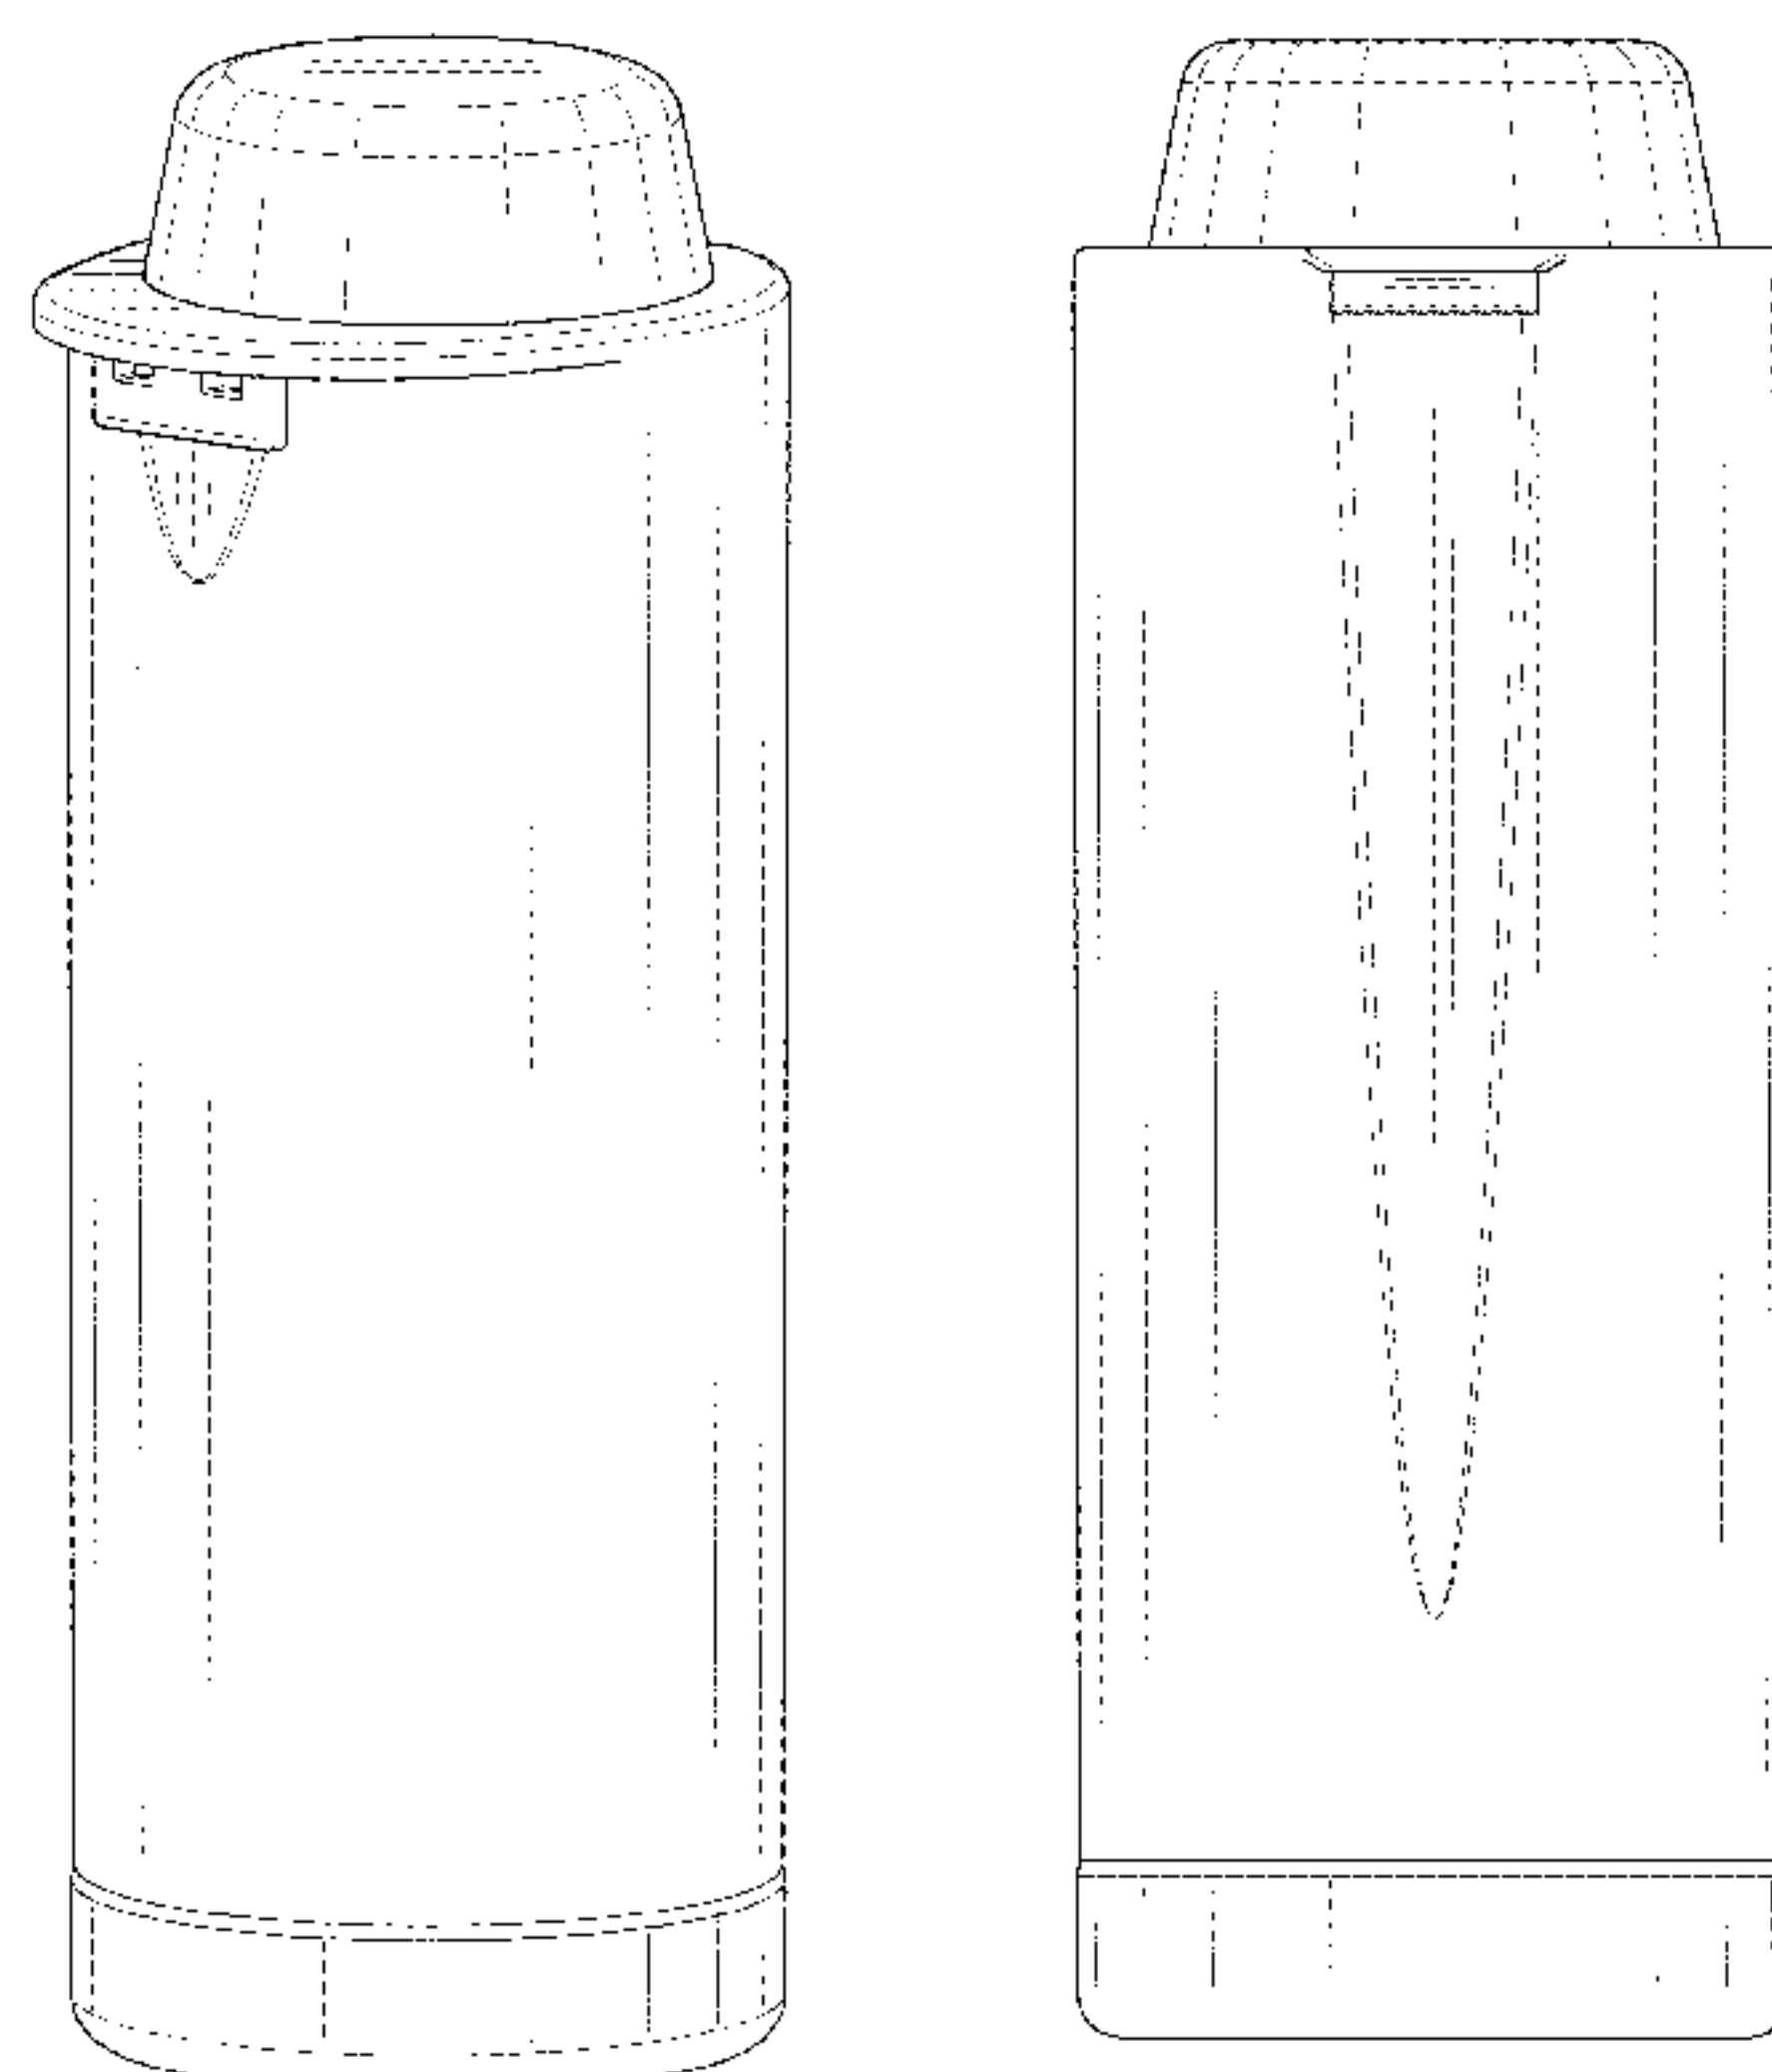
is a top perspective view of a container assembly showing our new design;
